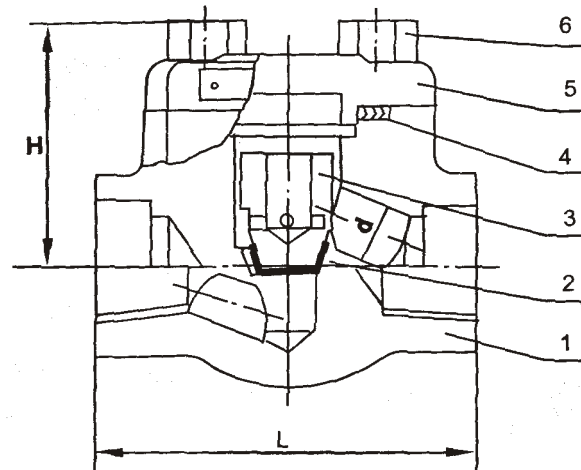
FORGED STEEL PISTON CHECK 800 P.S.I.
